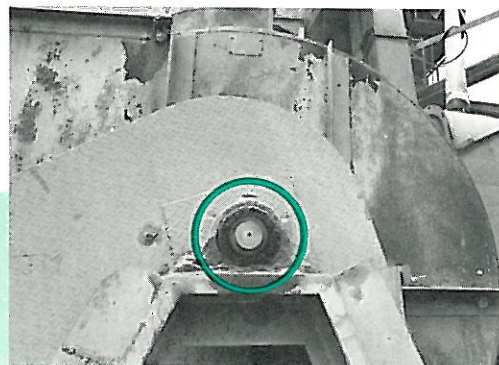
Close-up of the Foote-Jones Heavy Duty Pillow Block shown in 3-3. Note the amount of cement caked on the drive guard and on the Pillow Block Housing.
